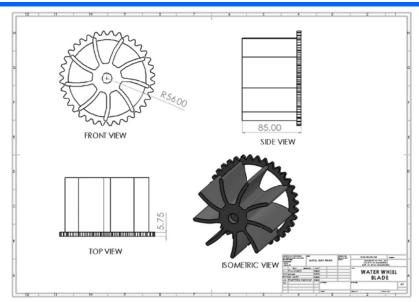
The isometric view of the water wheel with the gear incorporated to it
